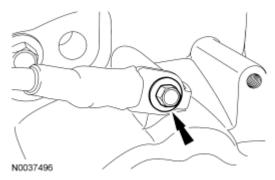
Locating Ground Wire Bolt Courtesy of FORD MOTOR CO.
